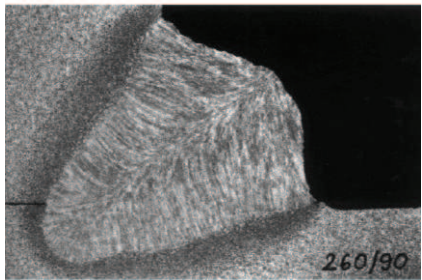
Incomplete filling of the weld groove.
